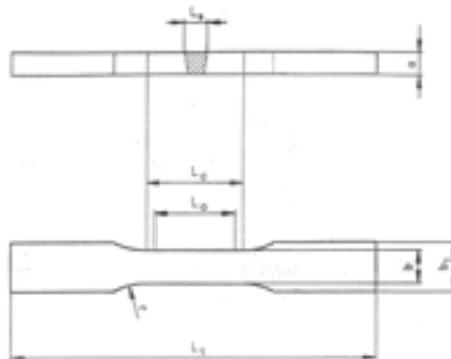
The shape and dimensions of flat test rod for tensile testing of butt welds according to EN 895, L_s – width of the the weld, L_1 – total length of the rod, L_0 – test length of rod, a – thick of rod, b_1 – neck width of the rod, b – neck width of the rod
